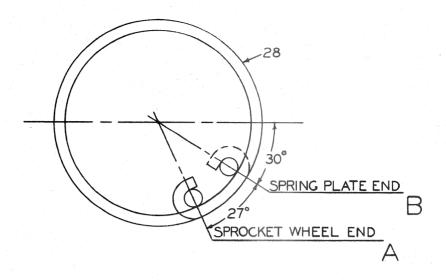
Looking at the End of the Closing Spring from the Motor Support Bracket End
